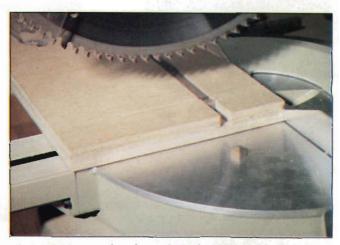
Photo E: Use a carrier board to cut the 1/4"-long plugs safely.
